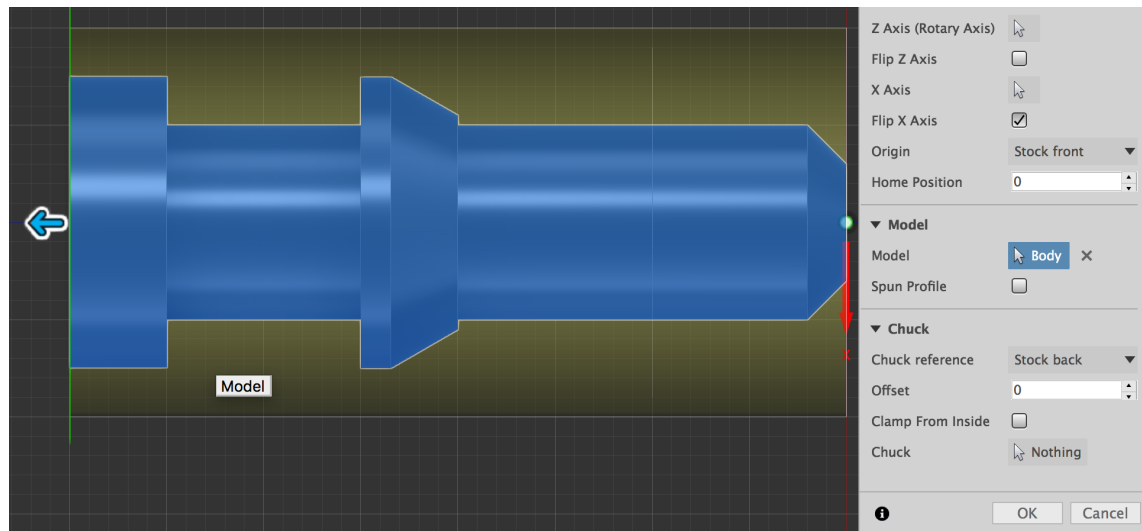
SELECTED MODEL FOR FUSION TO MACHINE.
